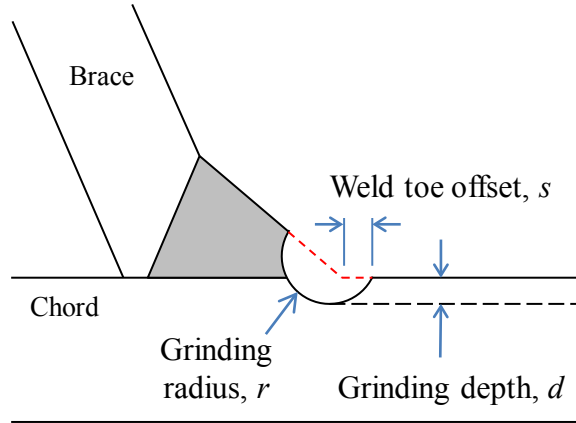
Guideline for weld toe grinding method (not to scale)
